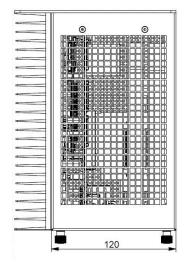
Dimensions: detail key hole (KBox Figure 43: Dimensions: top side (KBox C-C-103-NGSF)
